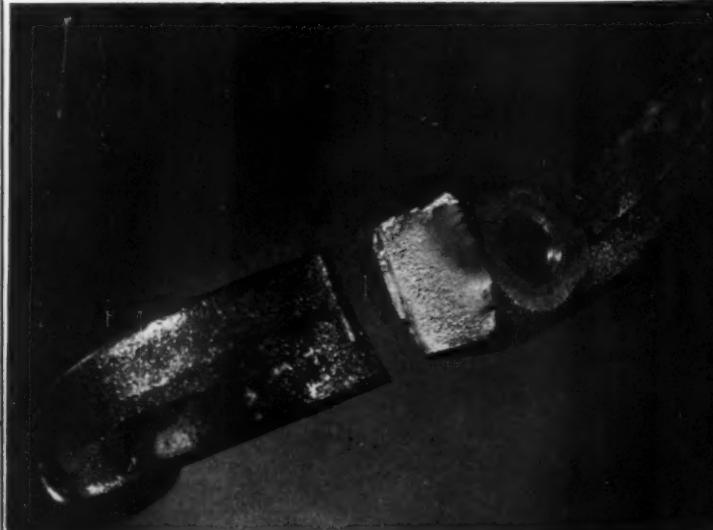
Failure of this steel forging during fatigue test was caused by the rough decarburized surface in combination with the sharp corner
